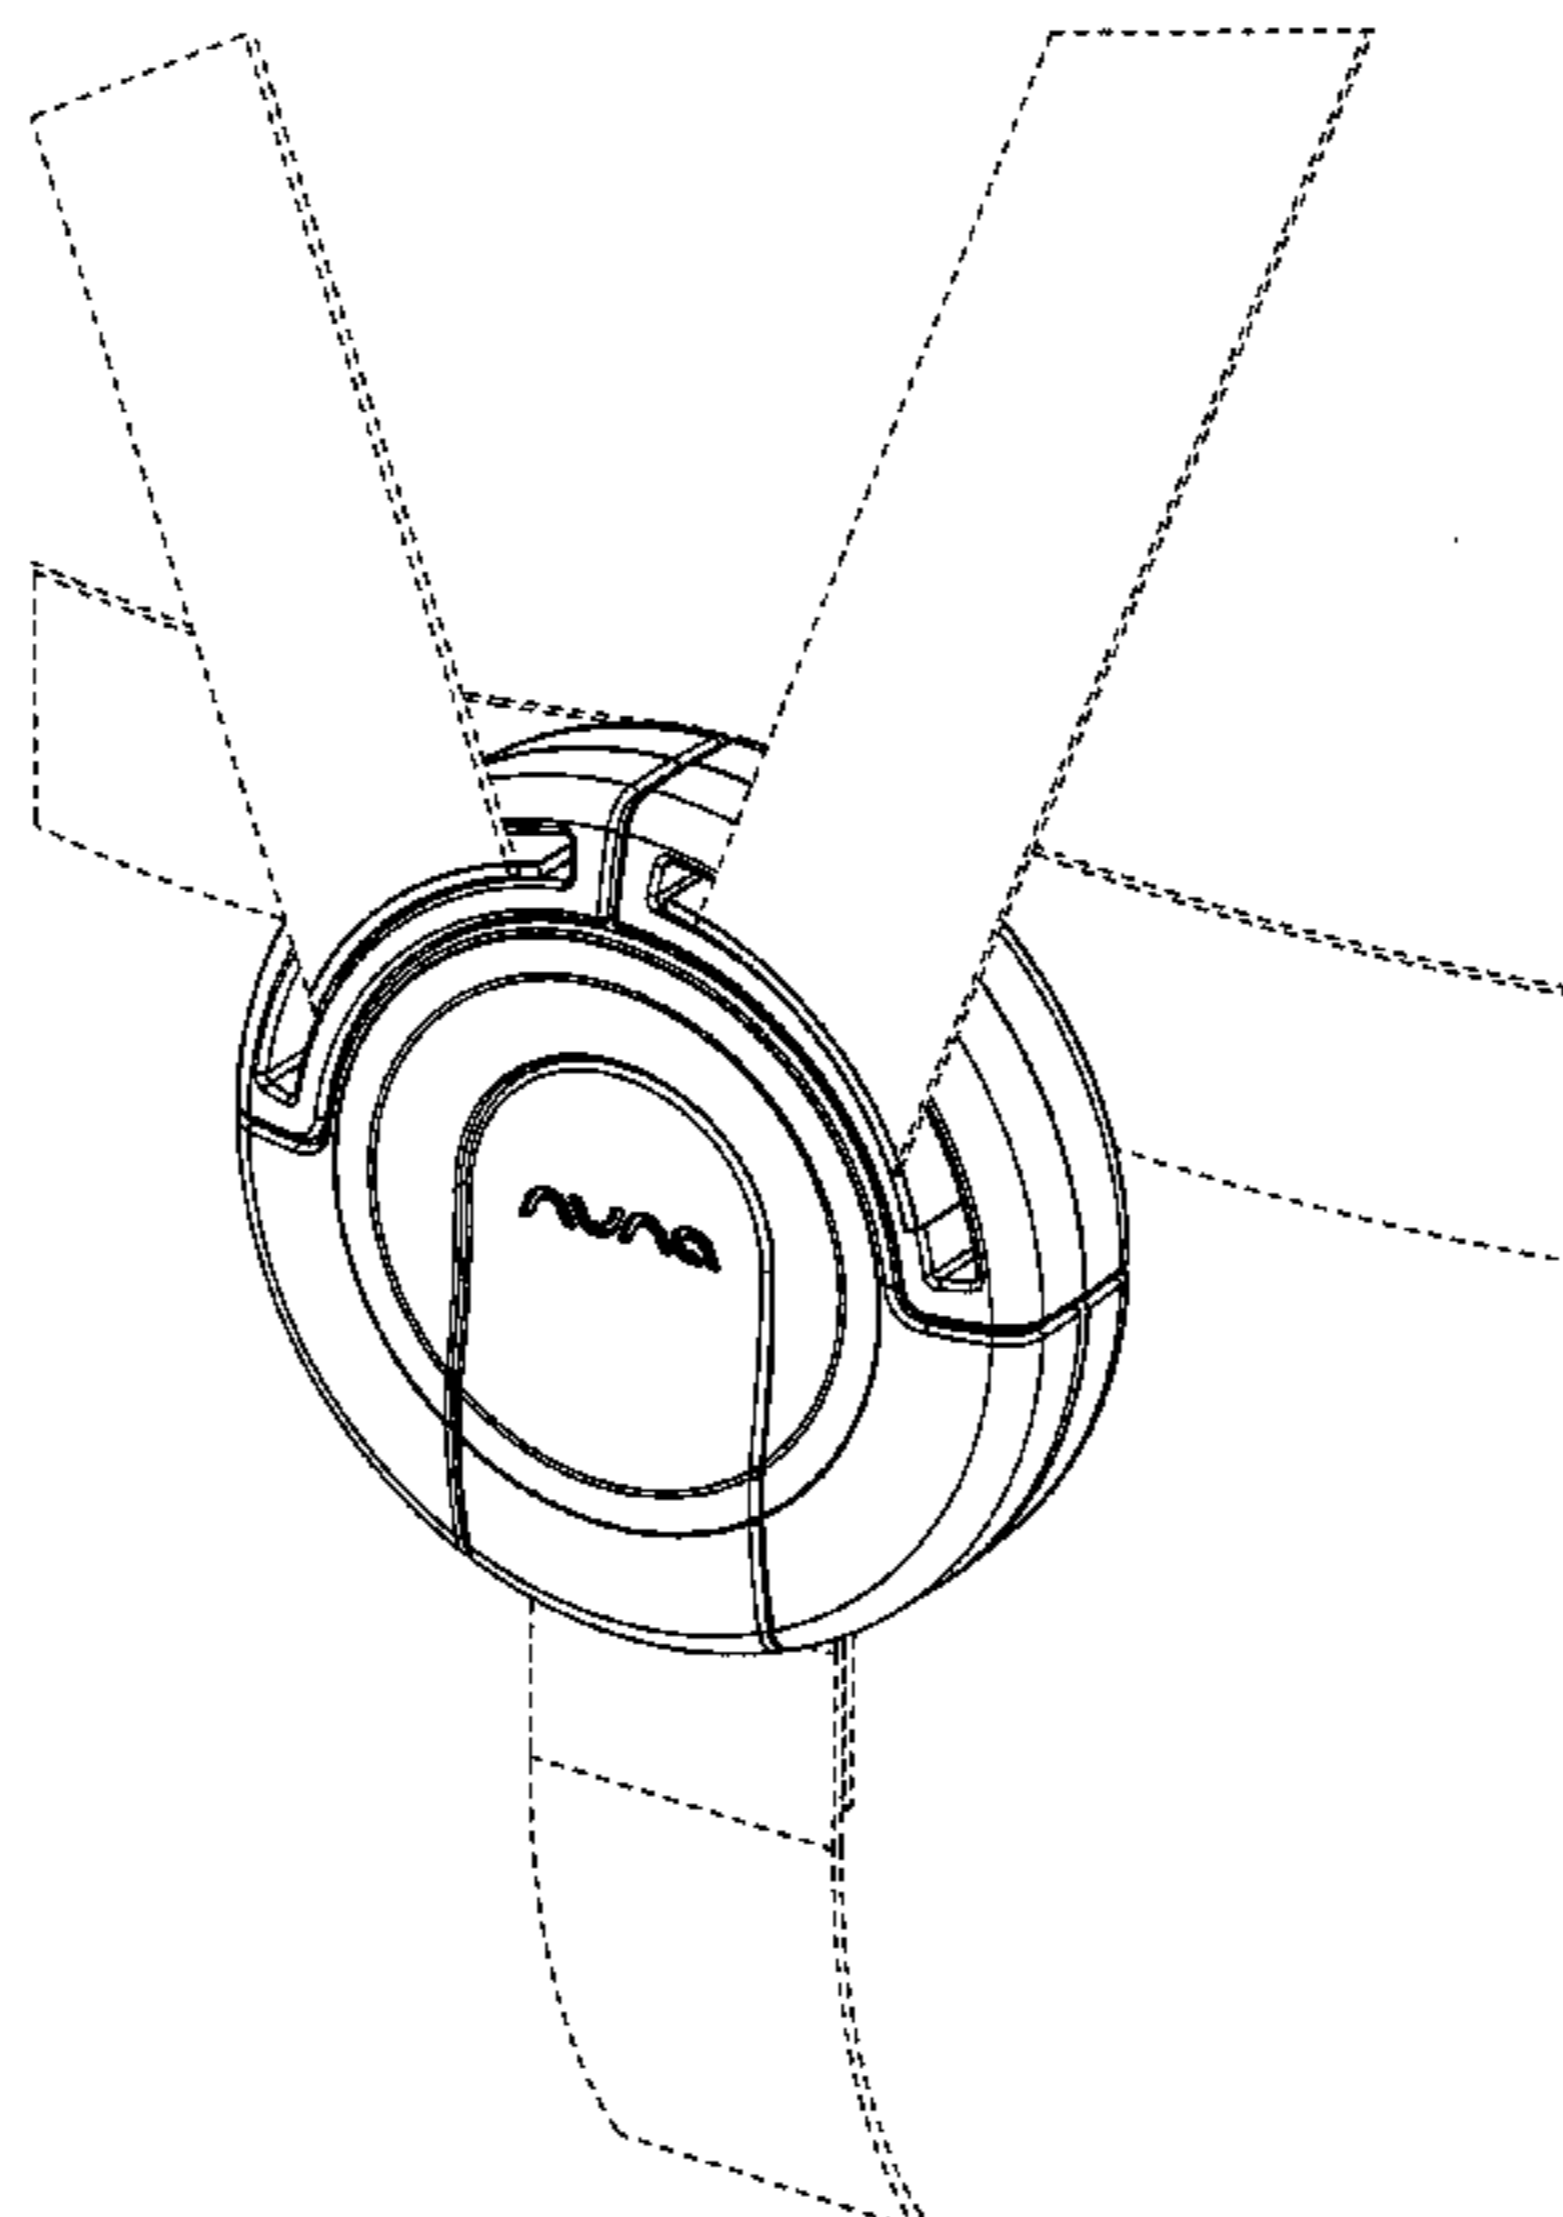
is a bottom view of the buckle assembly shown in FIG. 1 in a closed (latched) position;
